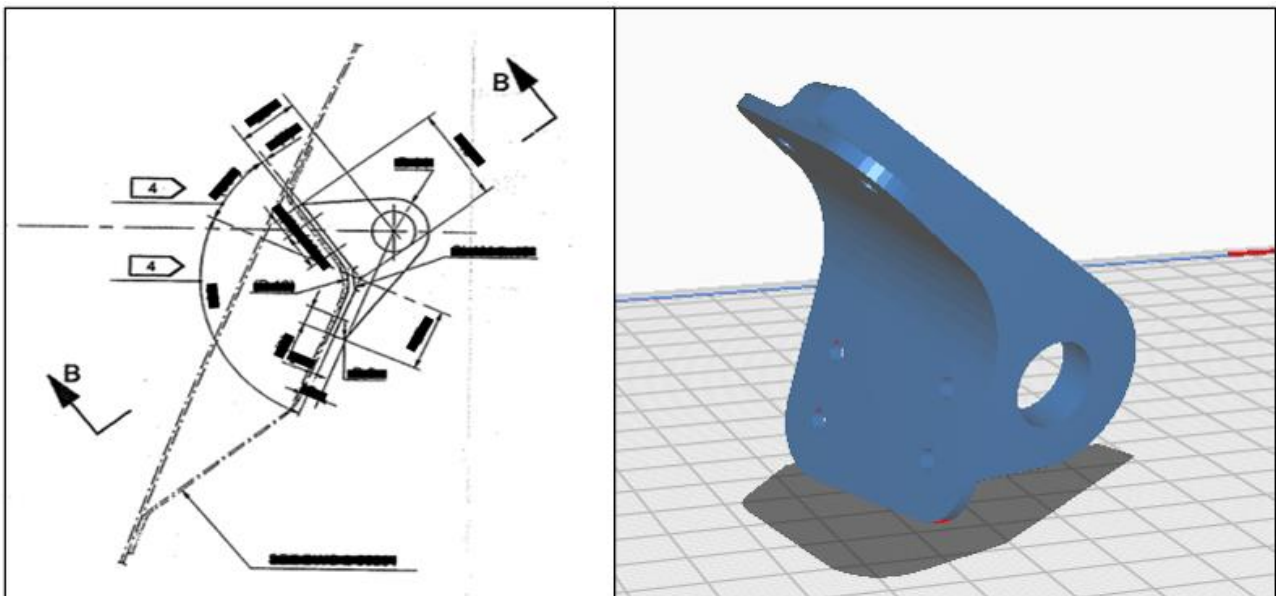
Technical drawing (left) and CAD drawing (right) of C-27J Bracket. (© Leonardo S.p.A.)
